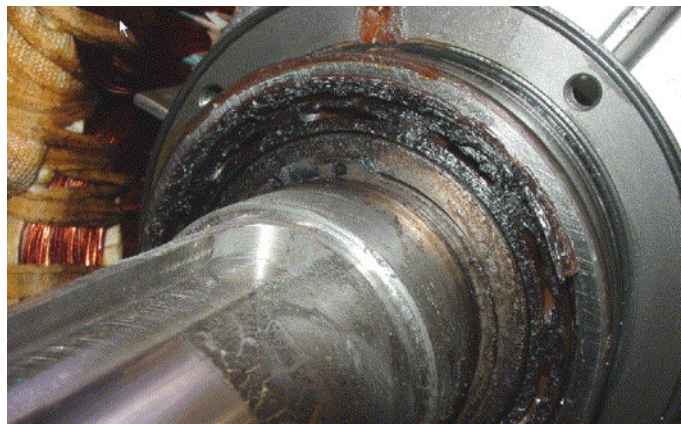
Excessive vibration causes rust on electric motor bearings.
